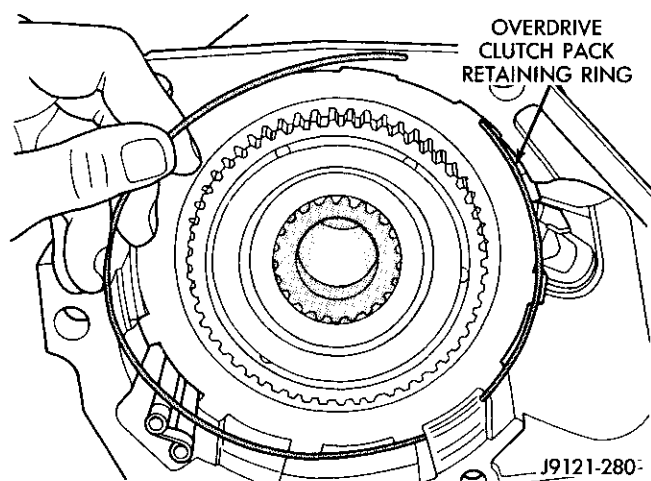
Removing/Installing Overdrive Clutch Pack Retaining Ring
